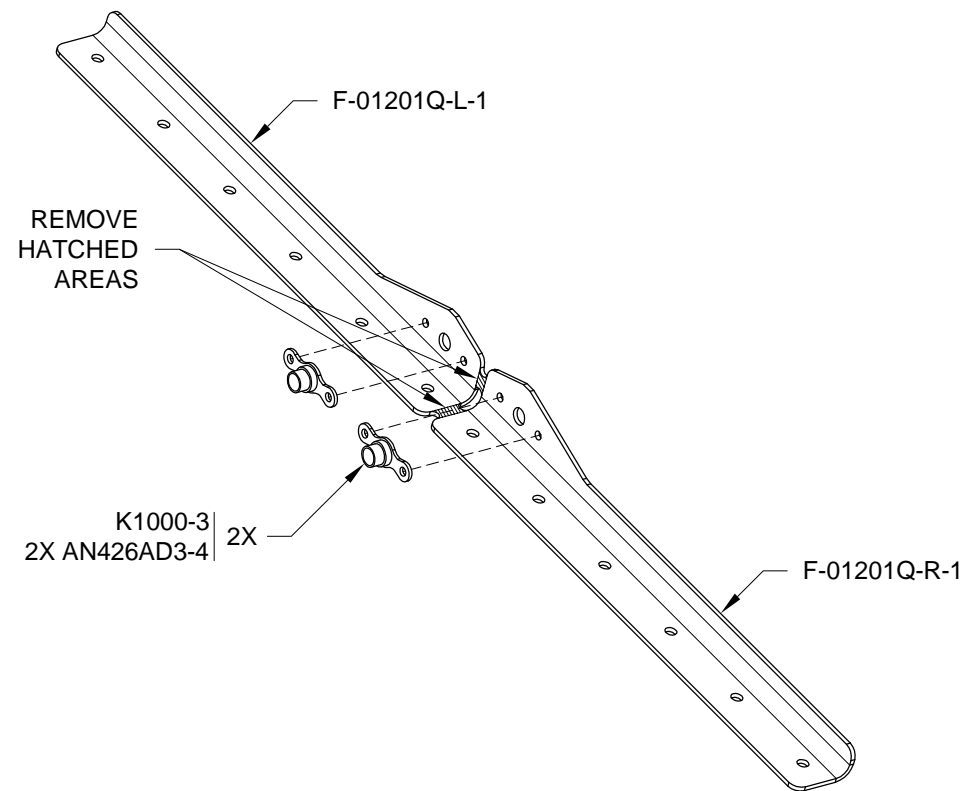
SEPARATING THE BATTERY BOX SIDE FLANGES
